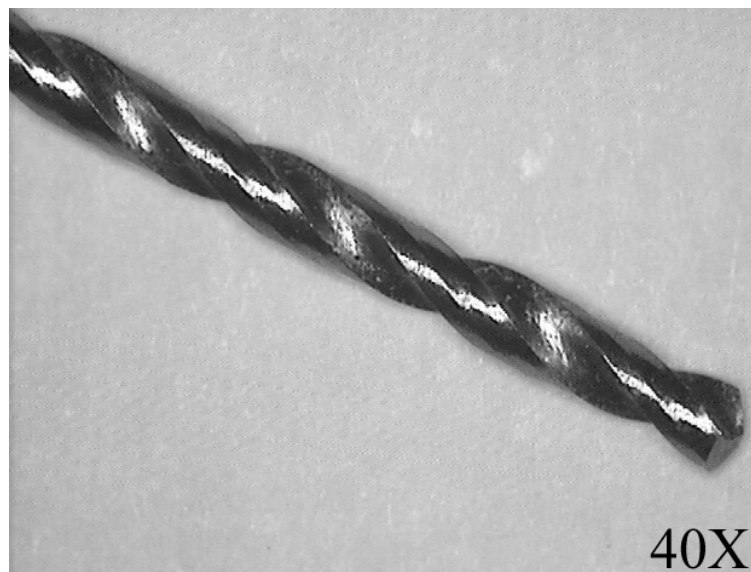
HSS drilling tool 1.0mm diameter under 40x by ICAMSCOPE
